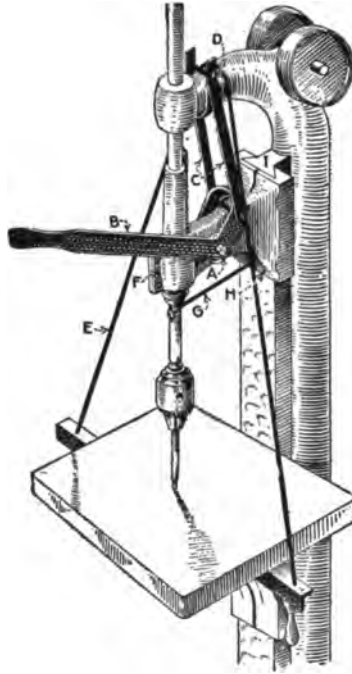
DRILLING MACHINE USED AS A PUNCH PRESS
